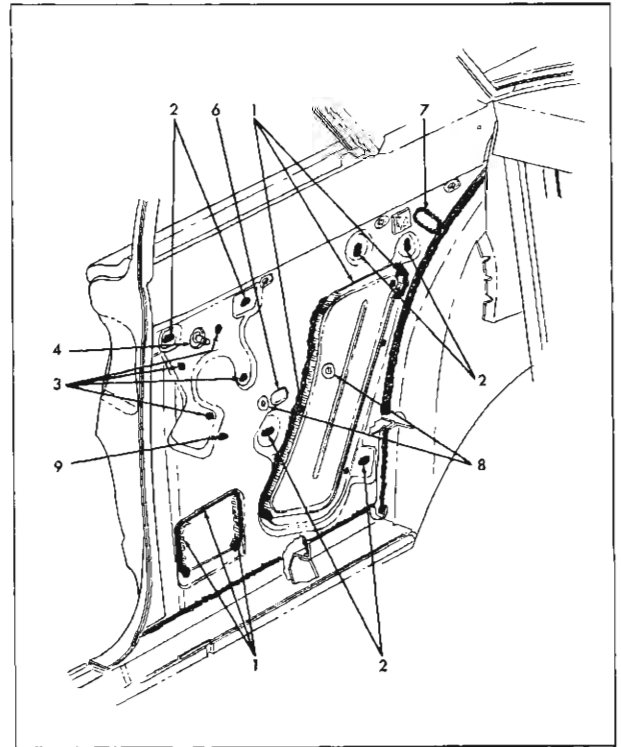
Rear Quarter Hardware "17" and "27" Styles
